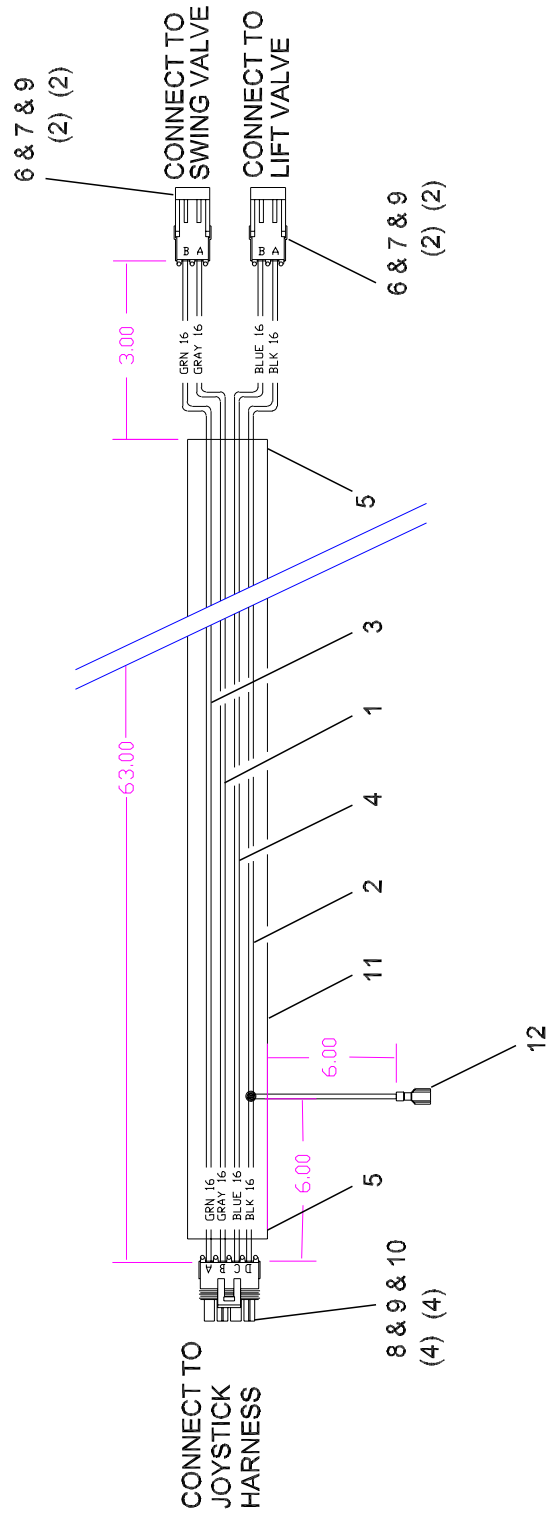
HARNESS, JOYSTICK TO VALVE
